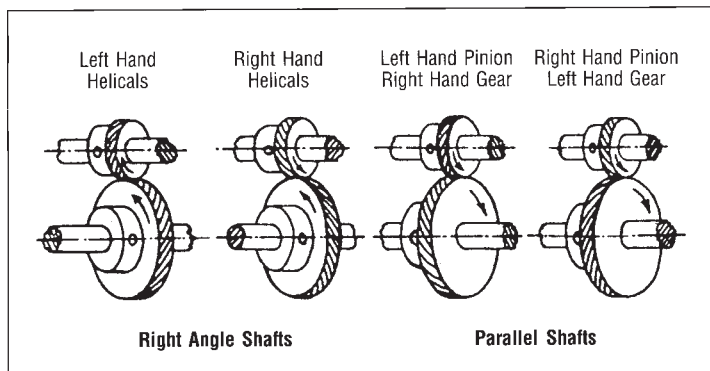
HELICAL GEARS OF THE SAME HAND MESH AT RIGHT ANGLES
